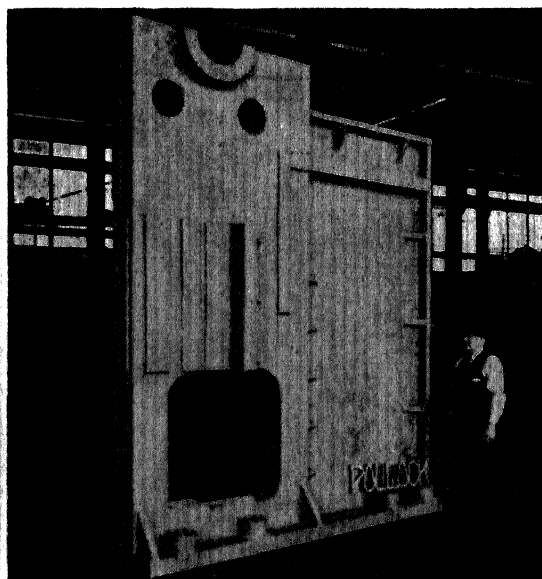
An interesting example of heavy plate fabrication. A tie plate and housing for a steel mill welded from exceptionally heavy steel slabs.
